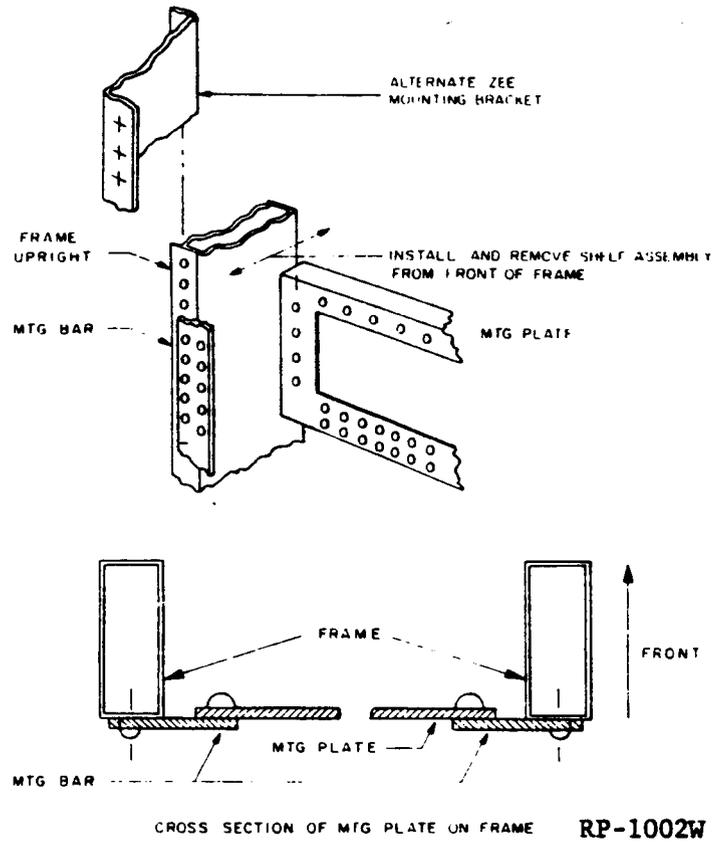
FRONT-REMOVABLE MOUNTING PLATE (PAR. 2.2.2.1)
